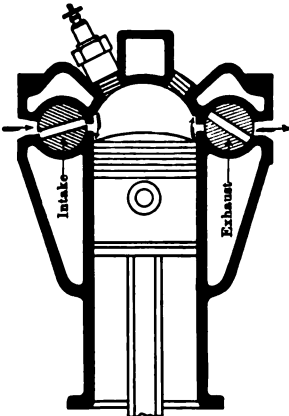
SPEEDWELL MOTOR WITH CYLINDRICAL VALVES
